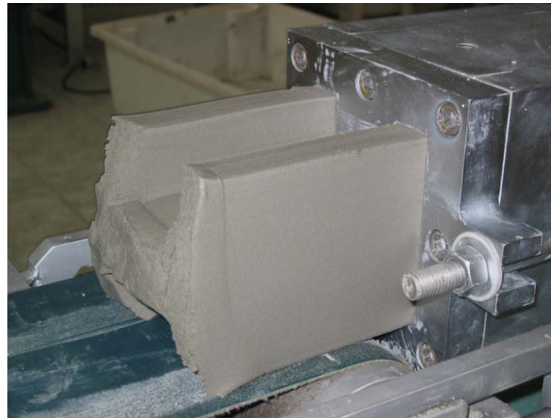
Extruded test specimen (Source: Rossetto (2007)).
